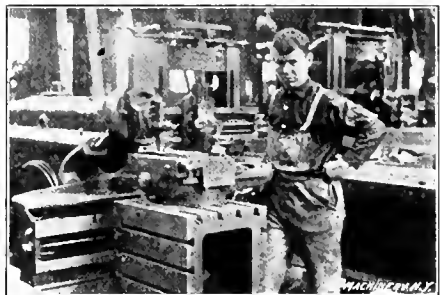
Apprentice at Work on Shaper, Lodge & Shipley Machine Tool Co.
